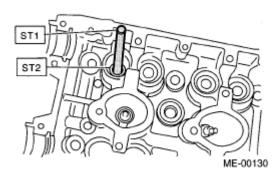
Identifying ST 18251AA020 Valve Guide Adjuster Courtesy of SUBARU OF AMERICA, INC.
